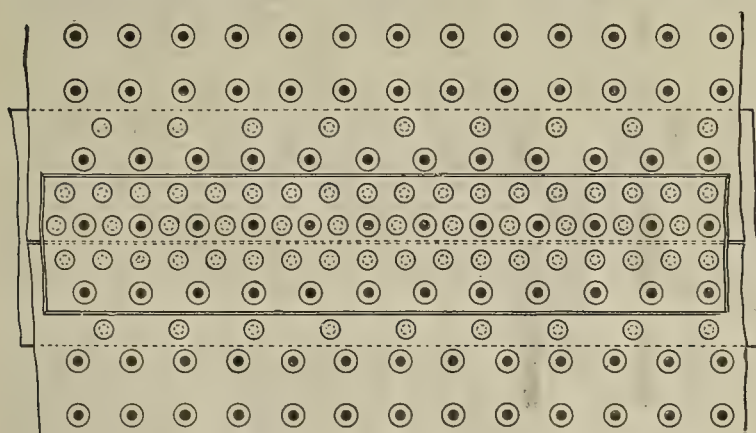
A TRIPLE RIVETED JOINT, WITH STAY BOLTS.
